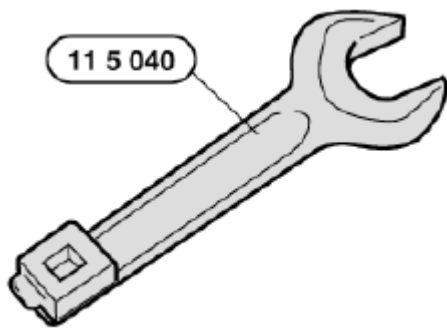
Identifying Special Tool (11 5 040 And 11 5 050)
